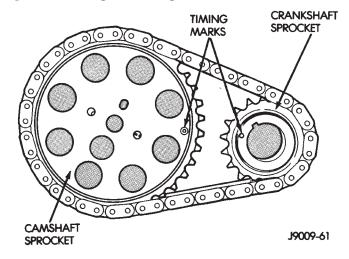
Crankshaft—Camshaft Alignment—Typical
